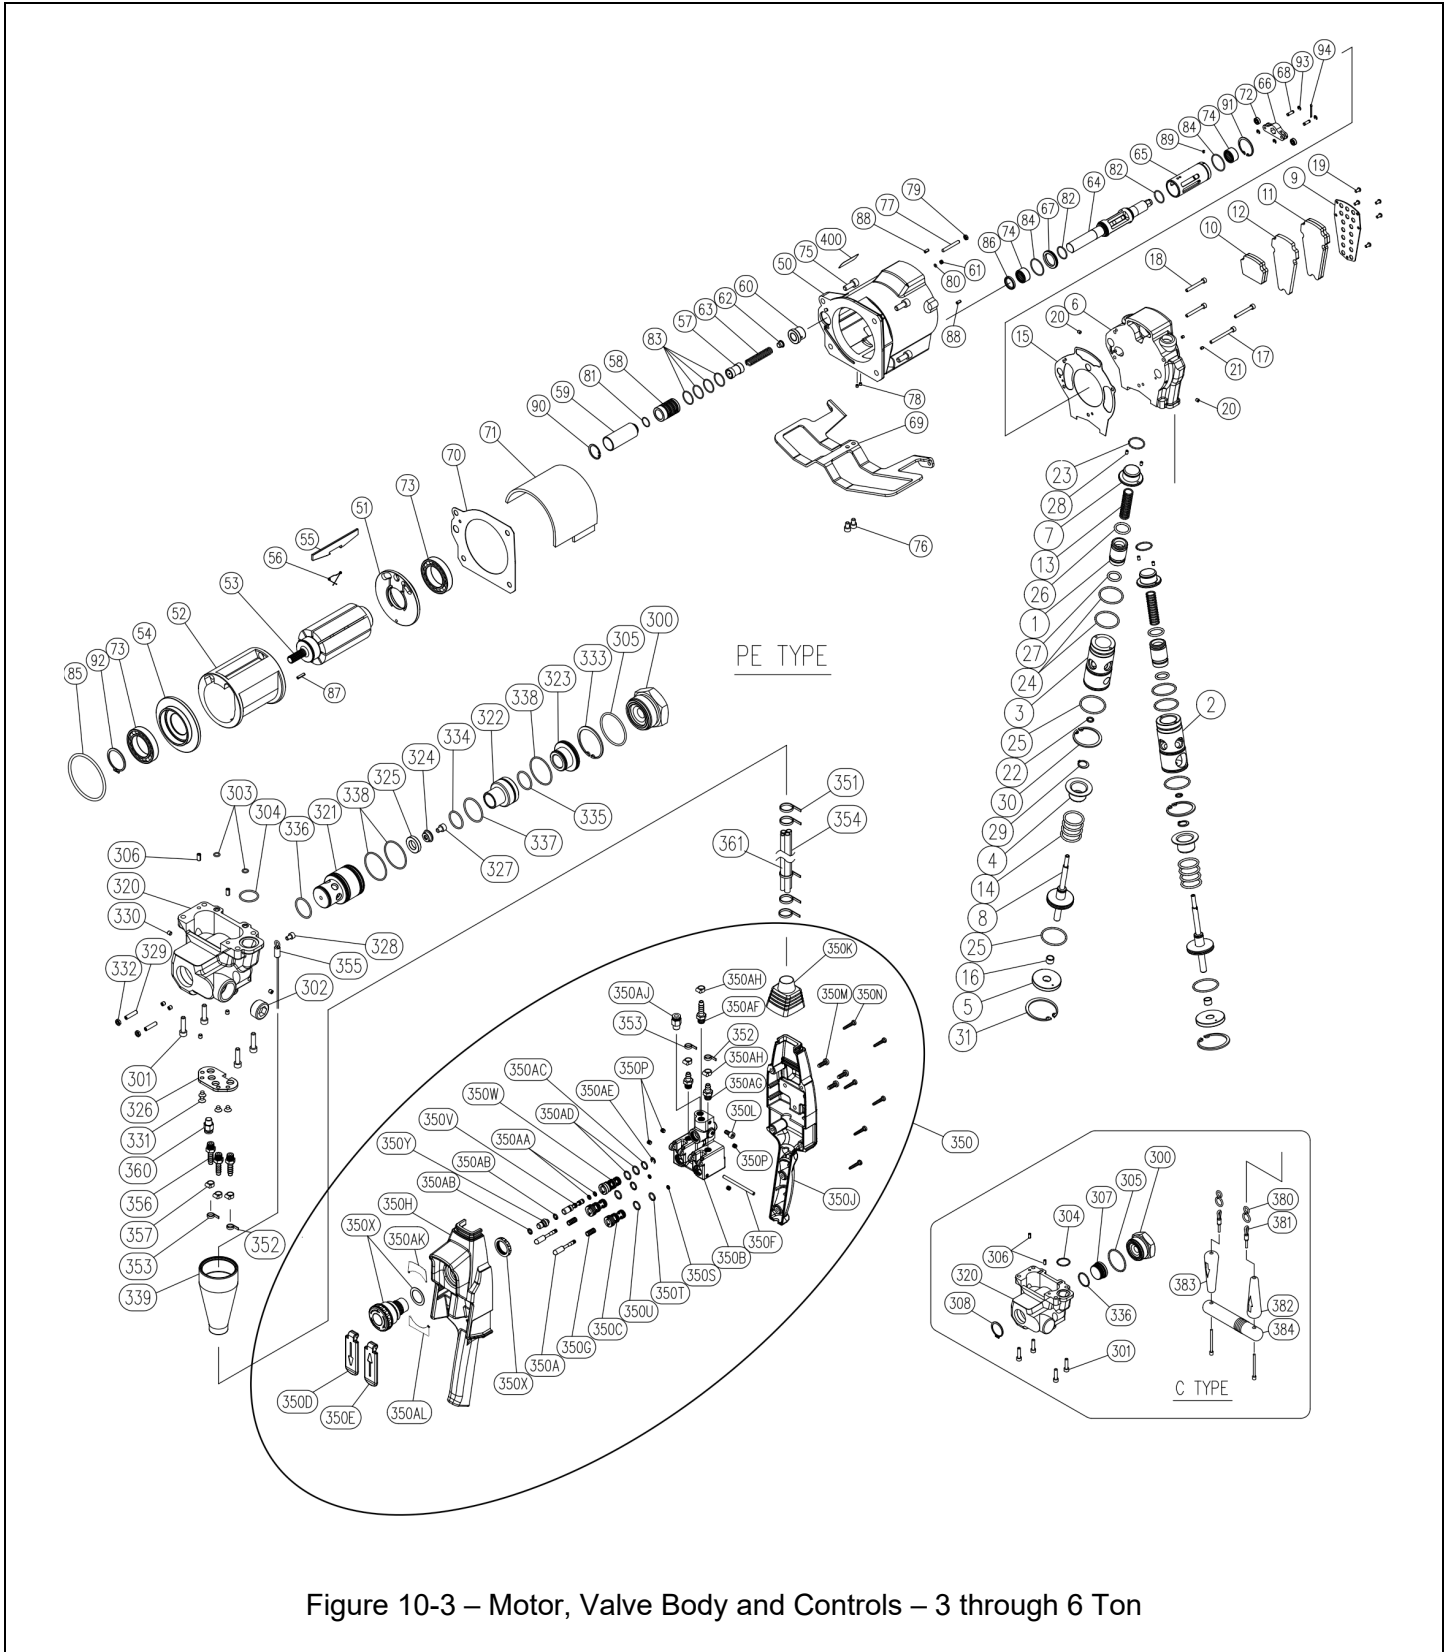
Motor, Valve Body and Controls – 3 through 6 Ton
